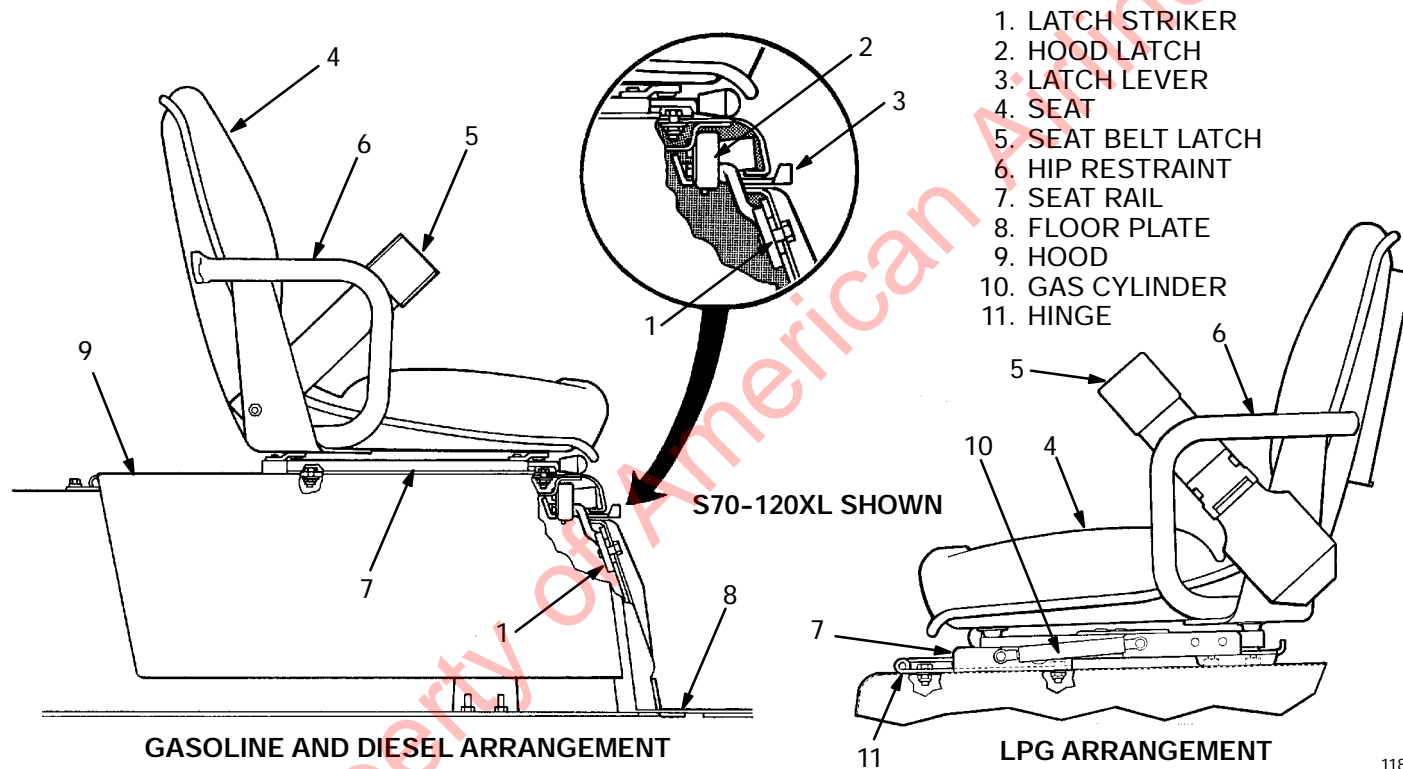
CHECK THE HOOD AND SEAT LATCHES
